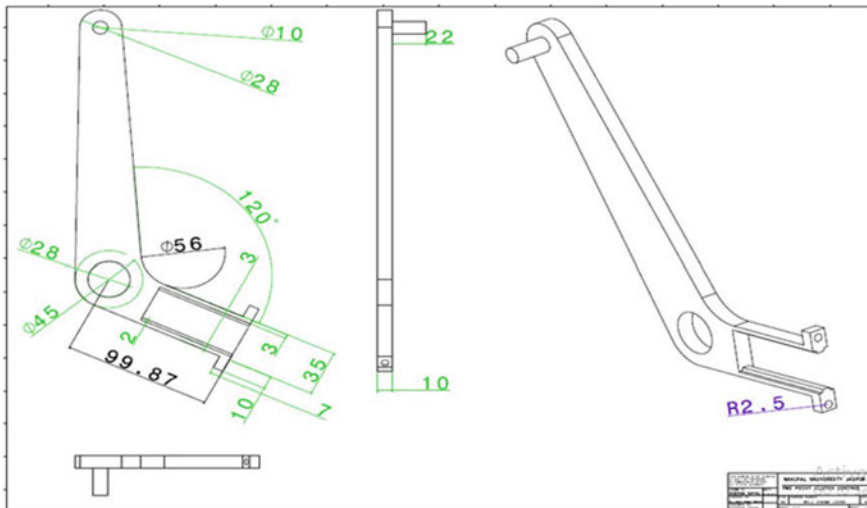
Shape and size of force tuner (all dimensions are in mm)
